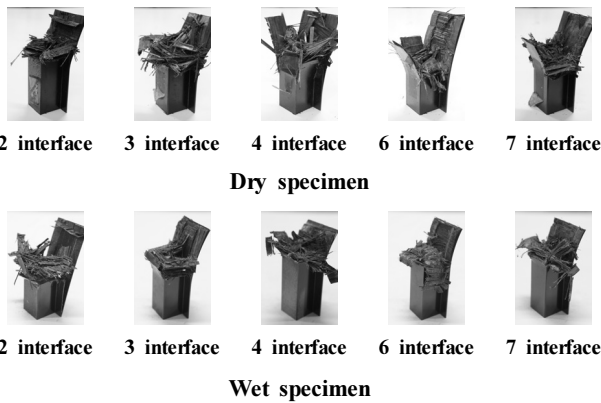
Collapsed shape of CFRP hat-shaped sectional members (outer 90°)
